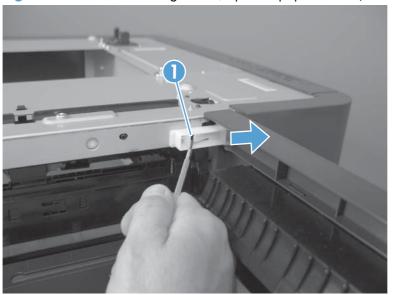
Remove the right door; optional paper feeder (2 of 3)
